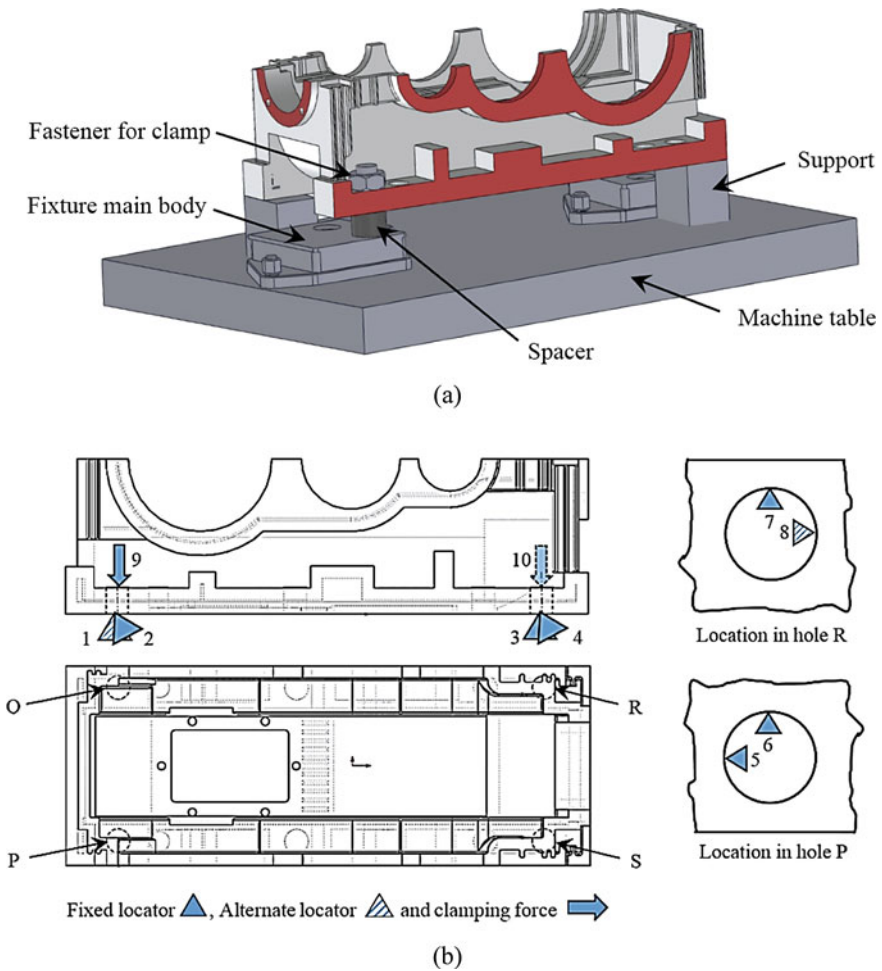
Gearbox case a mounting on the fixture assembly, b location system provided by the fixture
